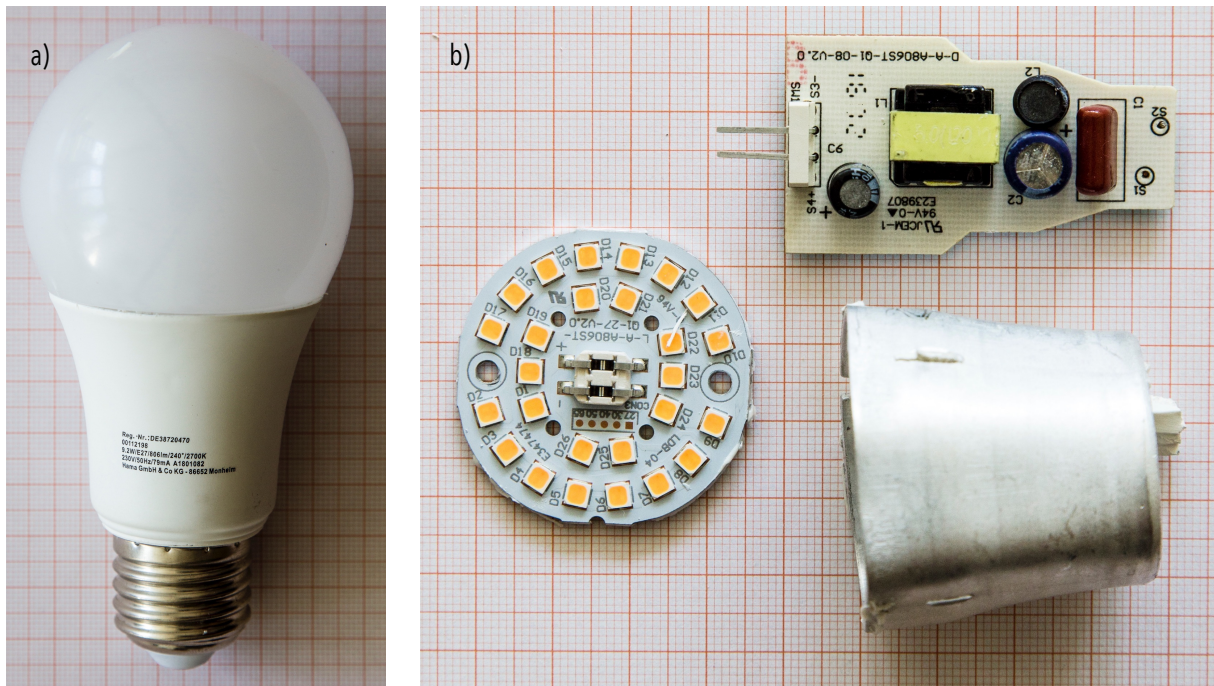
Xavax High Line. a) Product before disassembly. b) Left: Printed circuit board with surface mounted low-output LED chips. Upper right: Electrical driver unit with functional components. Lower right: Aluminum housing cup after removal of the plastic coating.
